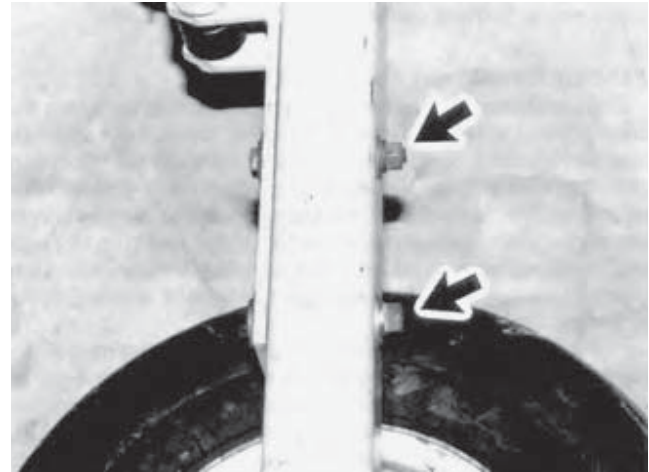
Bolt and Nut Holding Shock Mounting Plate in Position.
